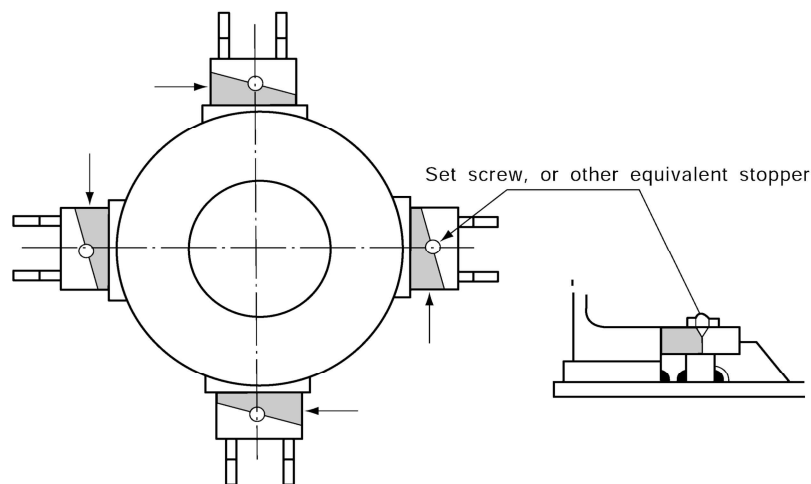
Fixing arrangement of rudder carrier on deck
